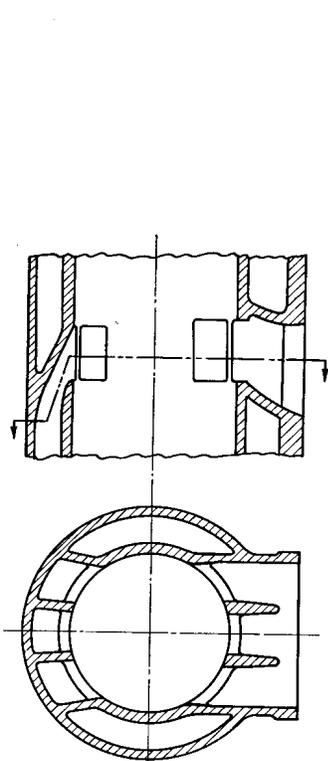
Ports of Typical Cross-Scavenged Engine.
